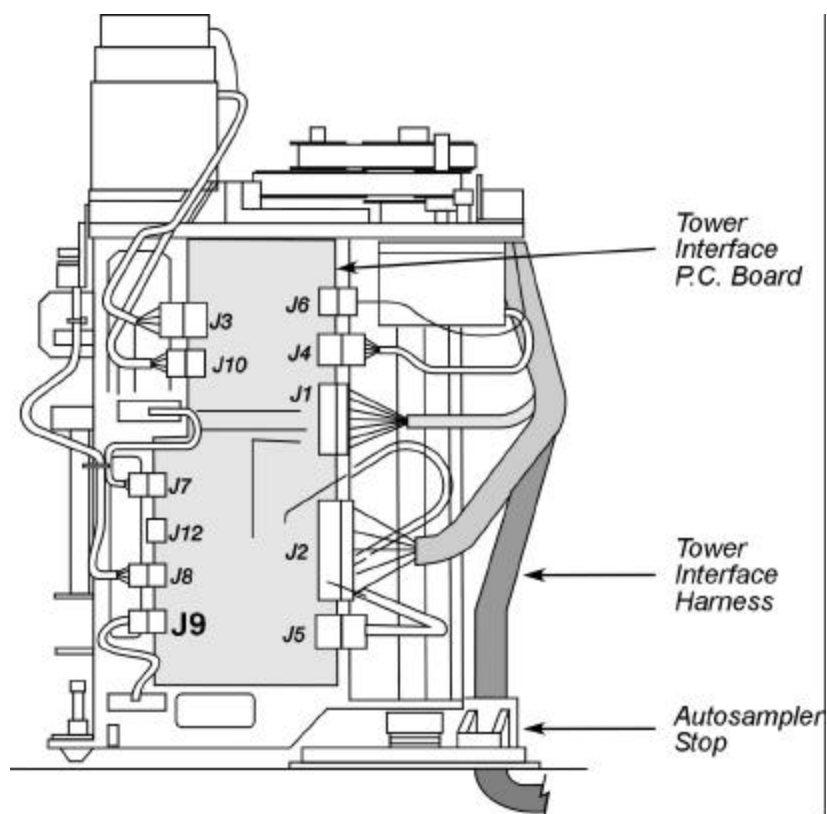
2 Connecting the tower interface harness to the tower interface p.c. board.
